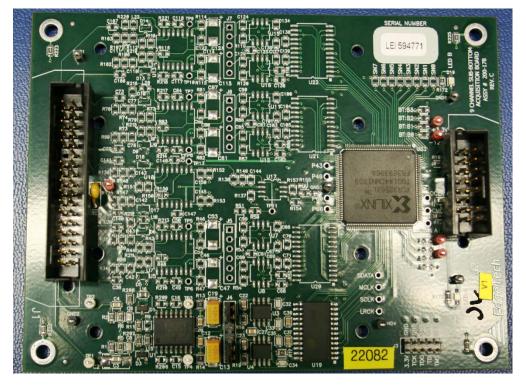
Tiger Board Set: Acquisition PCB - 0014231
